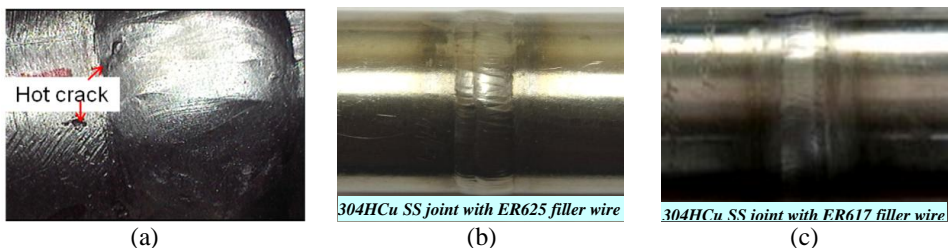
Macrographs of 304HCu SS weld joints: (a) hot crack in initial trials using ER625 filler wire; and WPQ weld joints made using (b) ER625 and (c) ER617 filler wires
